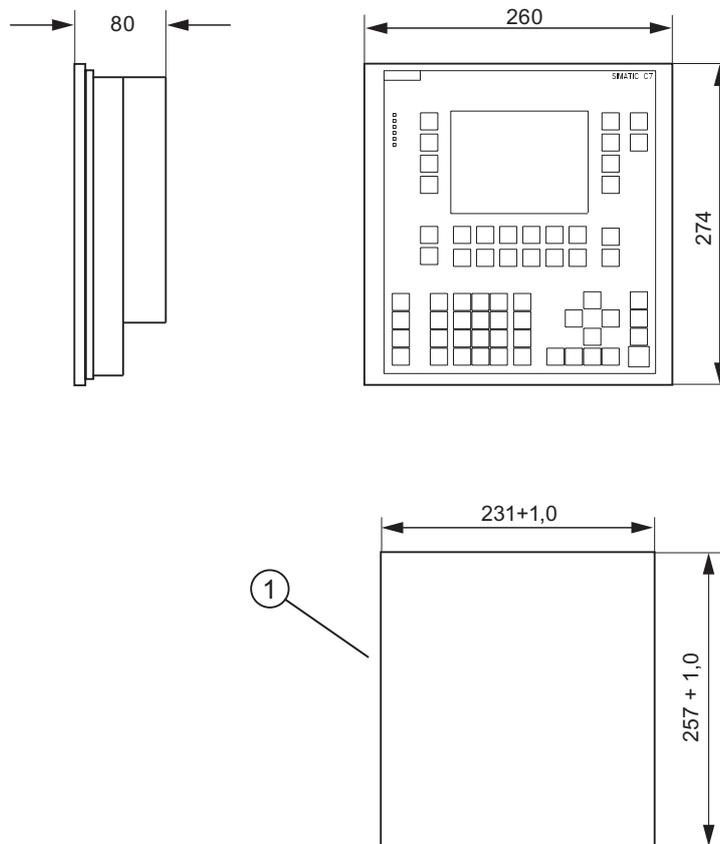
Dimension drawings for the C7-636 Key (dimensions in mm)
